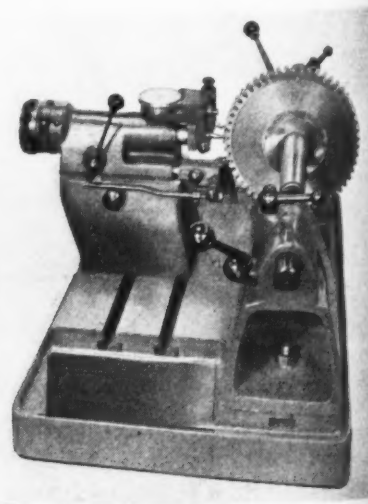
Fixture for Checking Circular Pitch or Tooth-to-tooth Spacing
